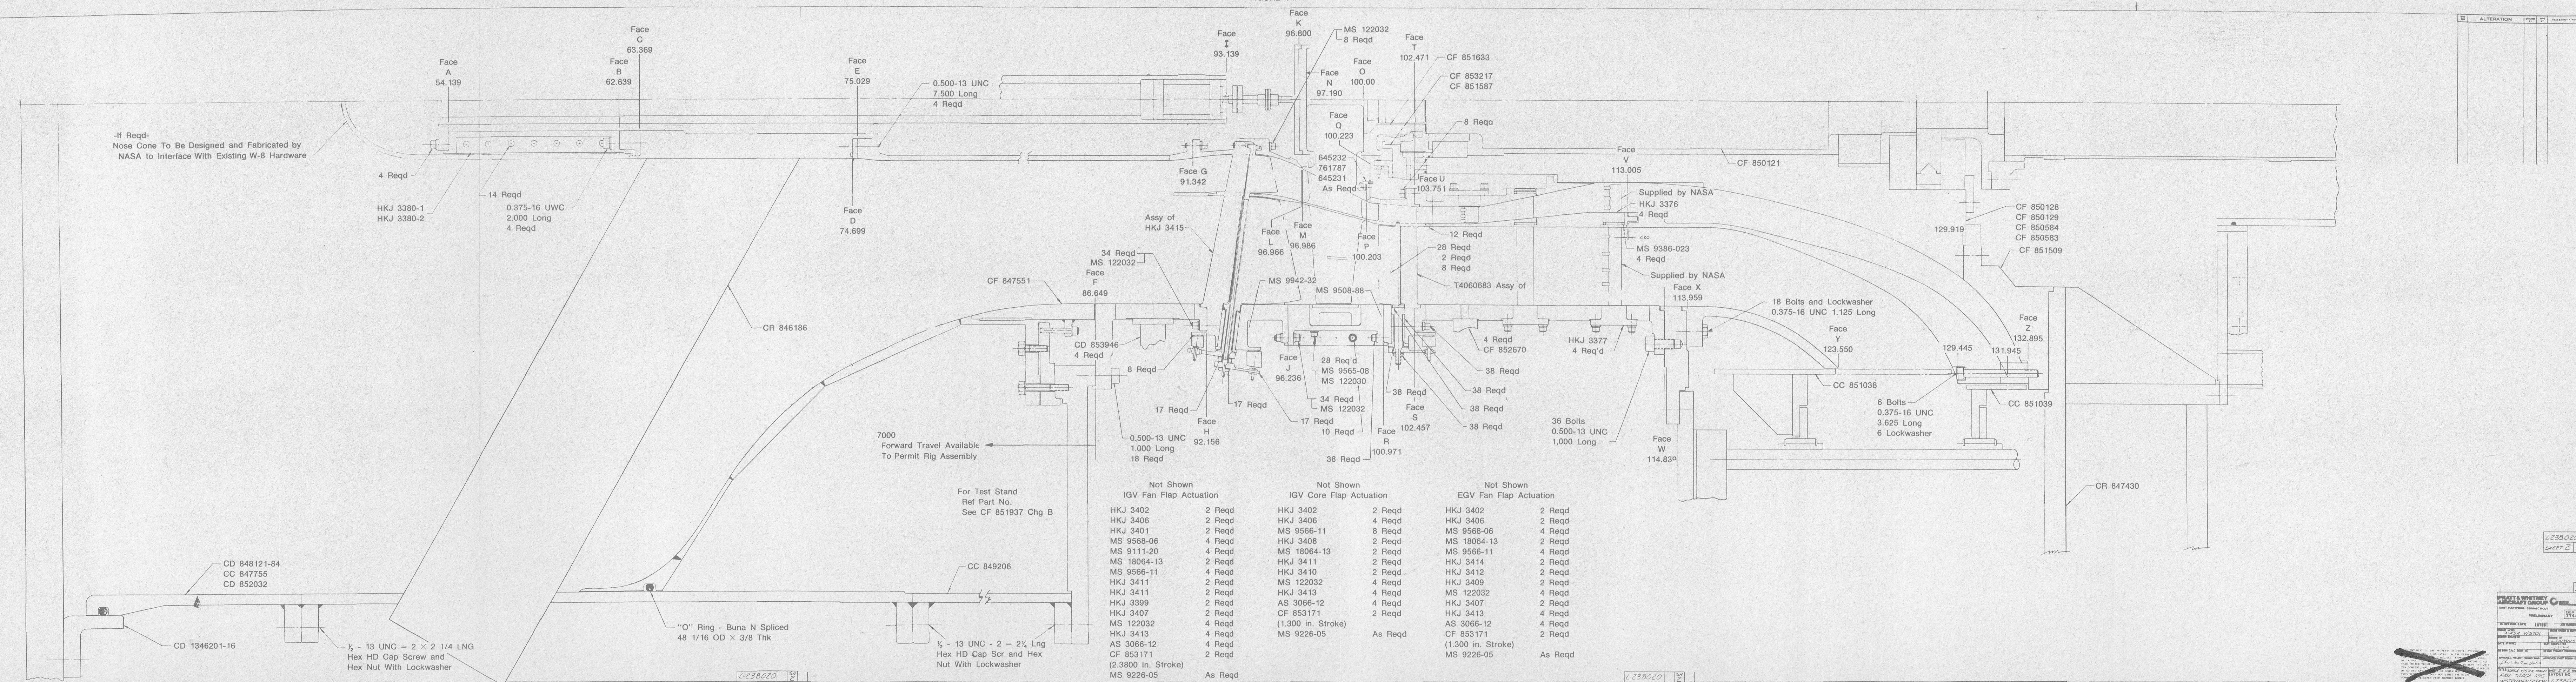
NASA V/STOL Model Fan Stage Rig — Assembly Inspection Stations
